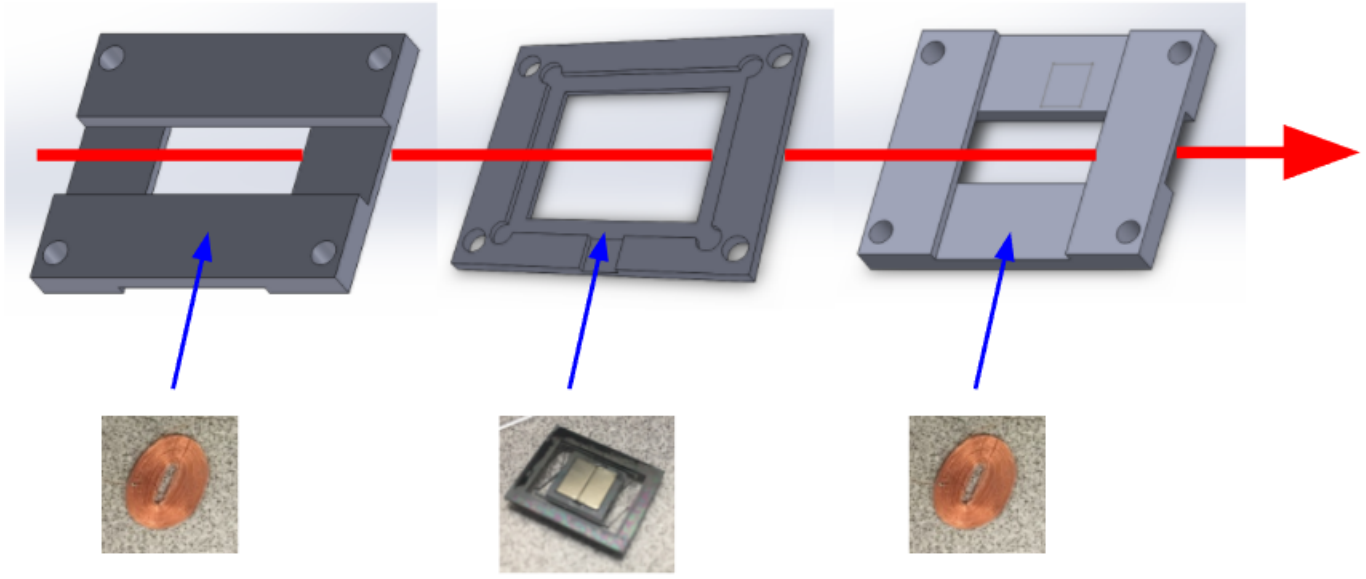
Three plastic printed parts that need to be combined along with the suspension and two coils to assemble into a harvester. Note that the top and bottom parts of the assembly each have an additional horizontal slot for backiron.
